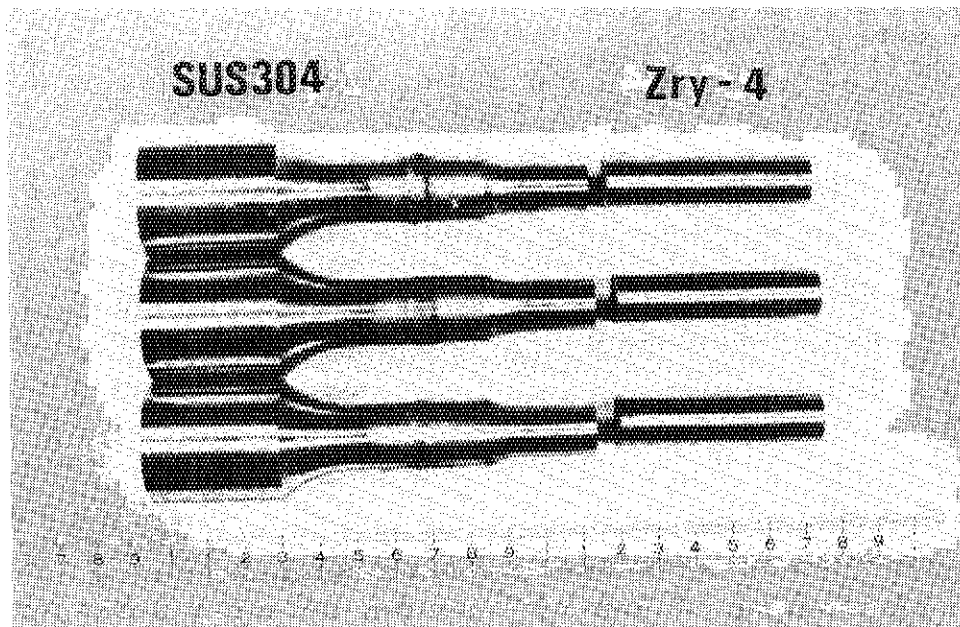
Specimen of the 45°-tapered eutectic joint for burst test (G1-G3)
